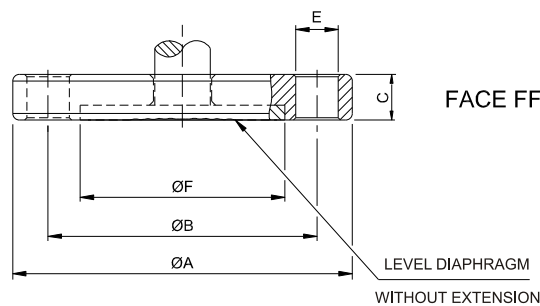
(b) – Dimensional Drawing and Mounting Position for LD290 - Sanitary
